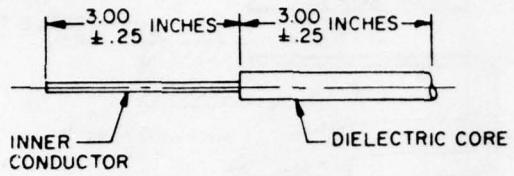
A Stripping Dimensions for Flexible Cables.
